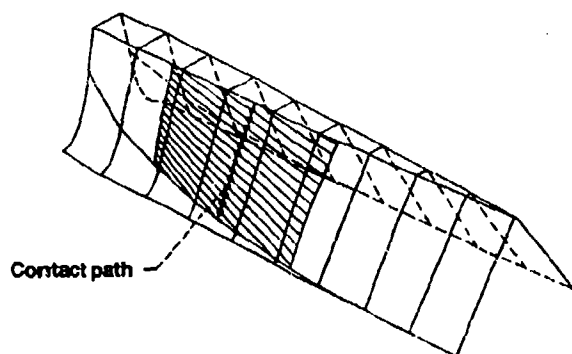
Aligned face-gear drive: localized bearing contact with  $\Delta N = 3$ .
